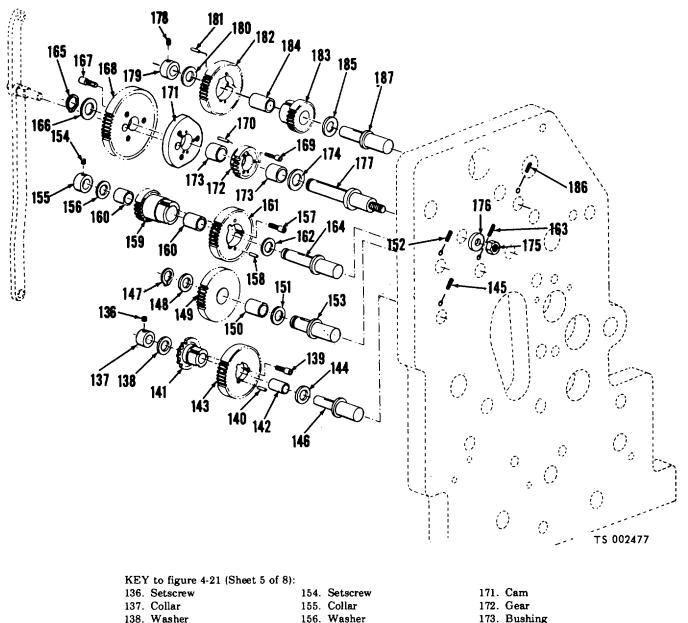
Ink motion assembly (Sheet 4 of 8).
